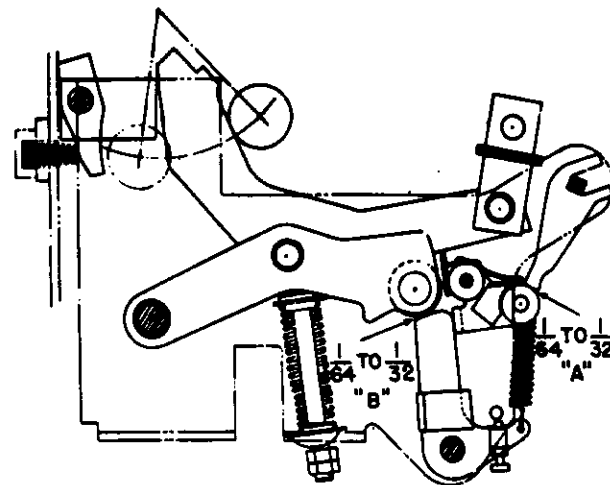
Rear view of electrically-operated front frame assembly, moving component
